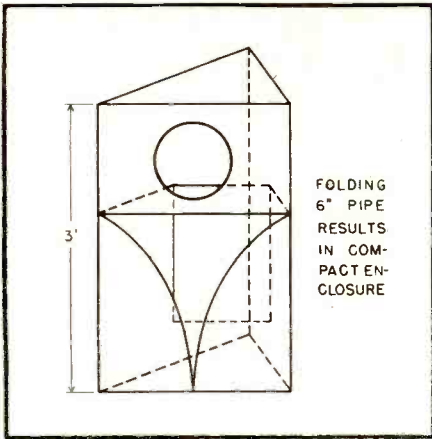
Appearance of cabinet after folding from the original "pipe" of Fig. 2.
